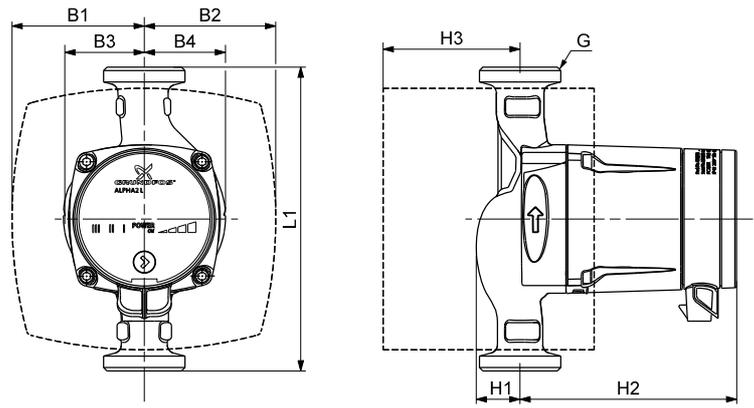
Dimensional sketches, ALPHA2 L XX-40, XX-50, XX-60
